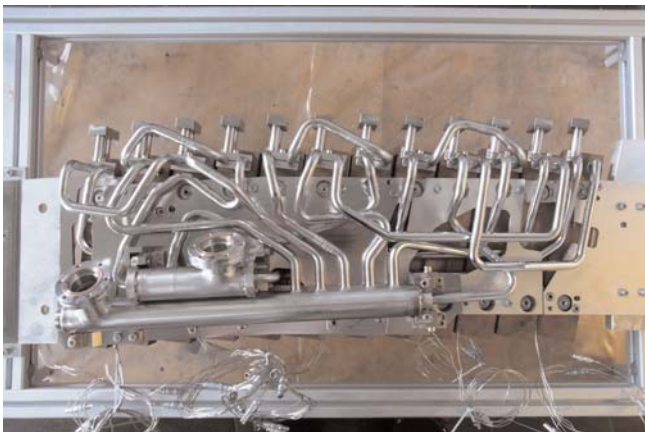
Backside of the test module prototype TM9h showing the complex piping arrangement.
